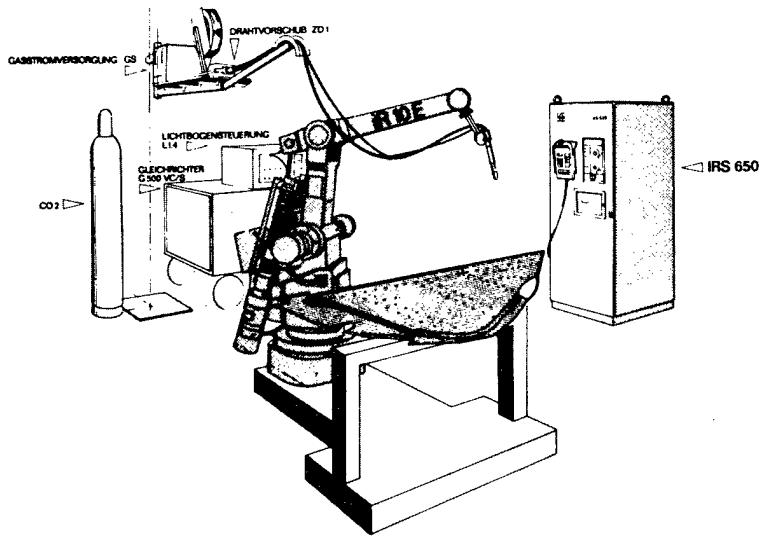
Articulated robot IR 10 E for MAG [expansion unknown] welding of lateral walls for the cutting blades of a mowing and threshing machine (figure: VEB "Progress," Neustadt).
